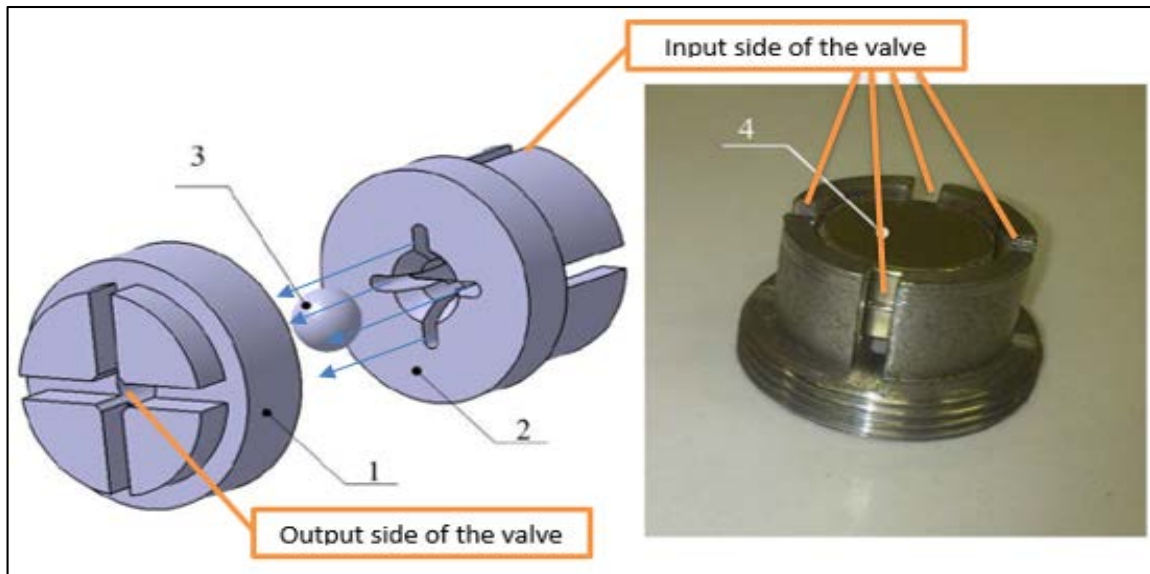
Shut off valve design, on the left three-dimensional model of the valve; on the right valve gate retaining component; (1 – valve saddle; 2 – valve cap; 3 – gate; 4 – magnets), (Volkov et al., 2014)
